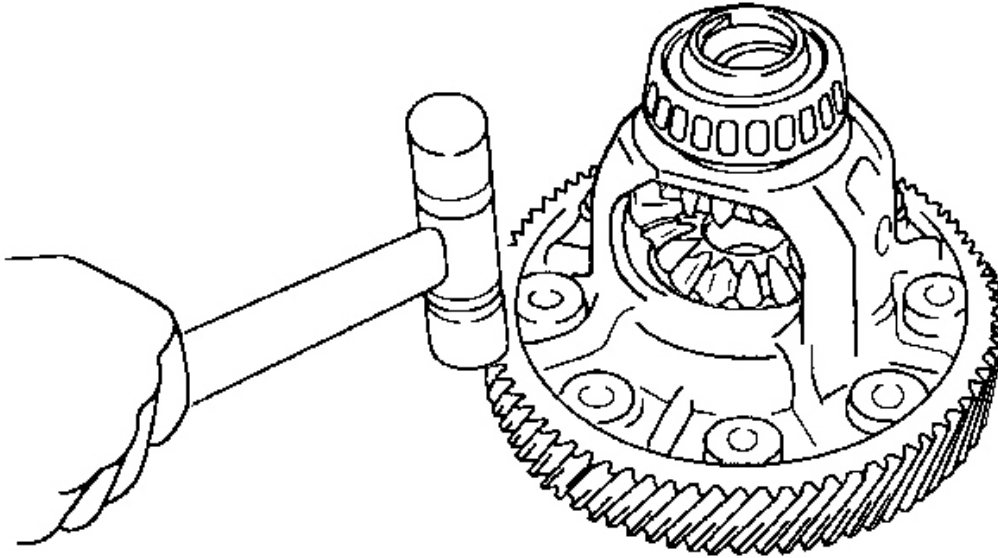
Taping On Ring Gear To Remove From Case Using A Plastic Hammer
